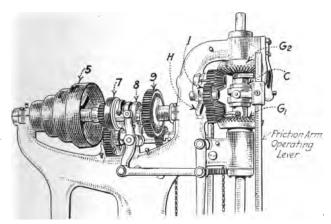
Spindle driving gears and reversing gears or "tapping attachment," shown with gear guards removed. By means of the friction clutch, the direct and indirect (back gear) speed mechanisms and the reverse gears, work may be drilled at fast speed, tapped at slow speed and the tap reversed and withdrawn at fast speed. (Cincinnati-Bickford Tool Co.)
